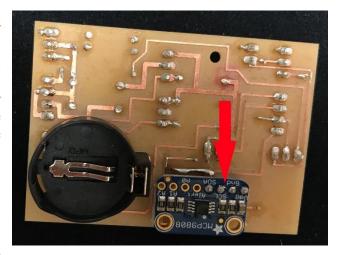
The temperature breakout board properly mounted alongside the RTC coin cell holder.
